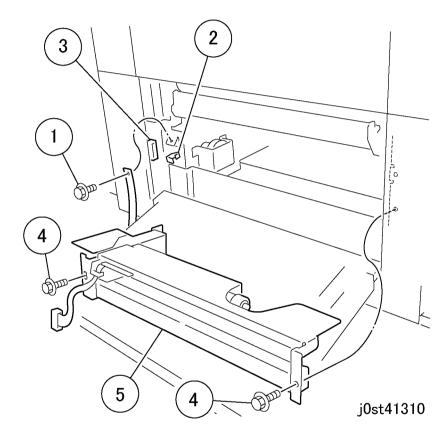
Removing the Tray 3 Assembly (j0st41310)
